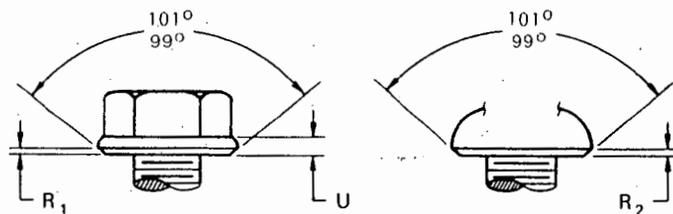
A—HEX WASHER HEAD FIG. 1B—RECESSED HEADS
